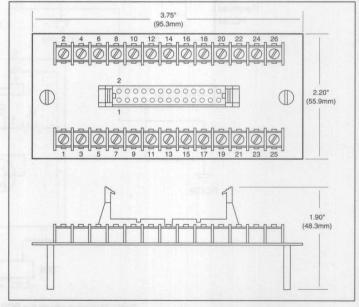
SCMXIF Universal Interface Board Dimensions.
